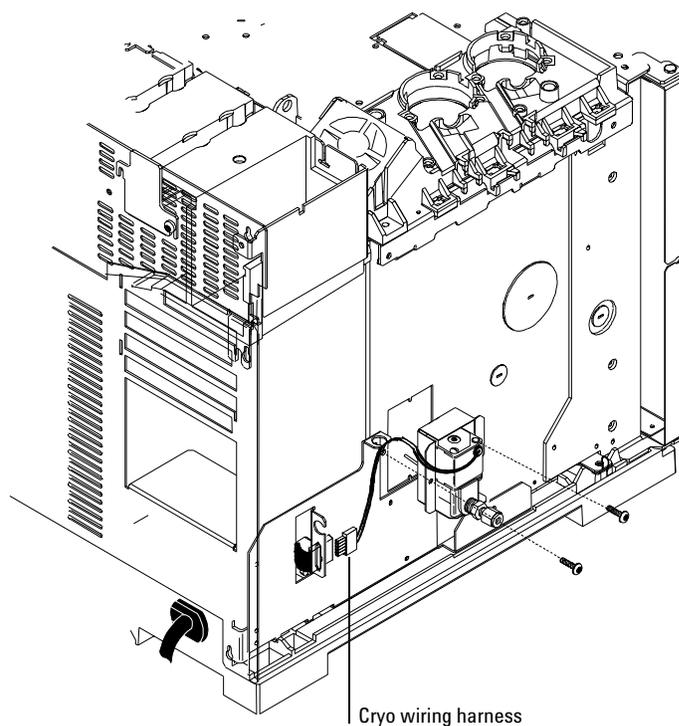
Attaching the valve box to the side of the GC (CO₂ valve shown)
